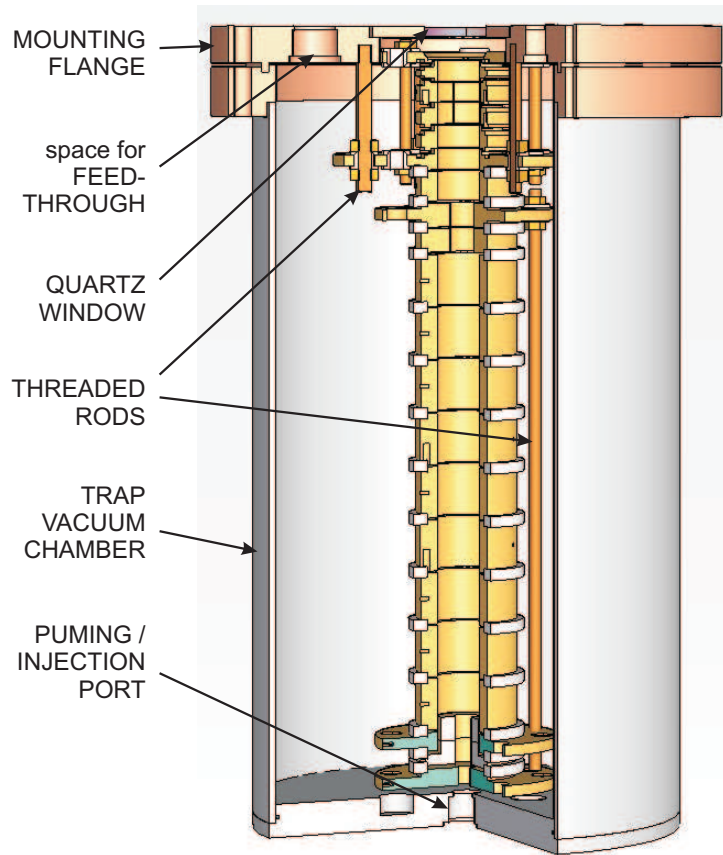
Drawing of the copper ultra-high vacuum chamber with the trap assembly. (Courtesy of N. Brantjes)
